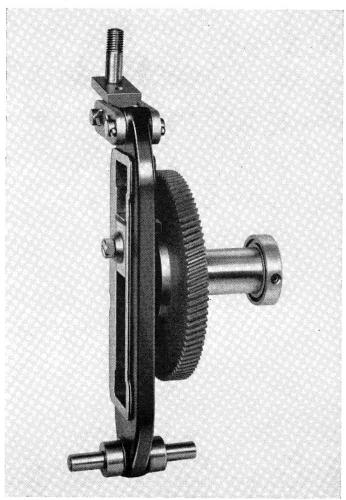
Showing Stroke Adjustment of Bull Gear.
